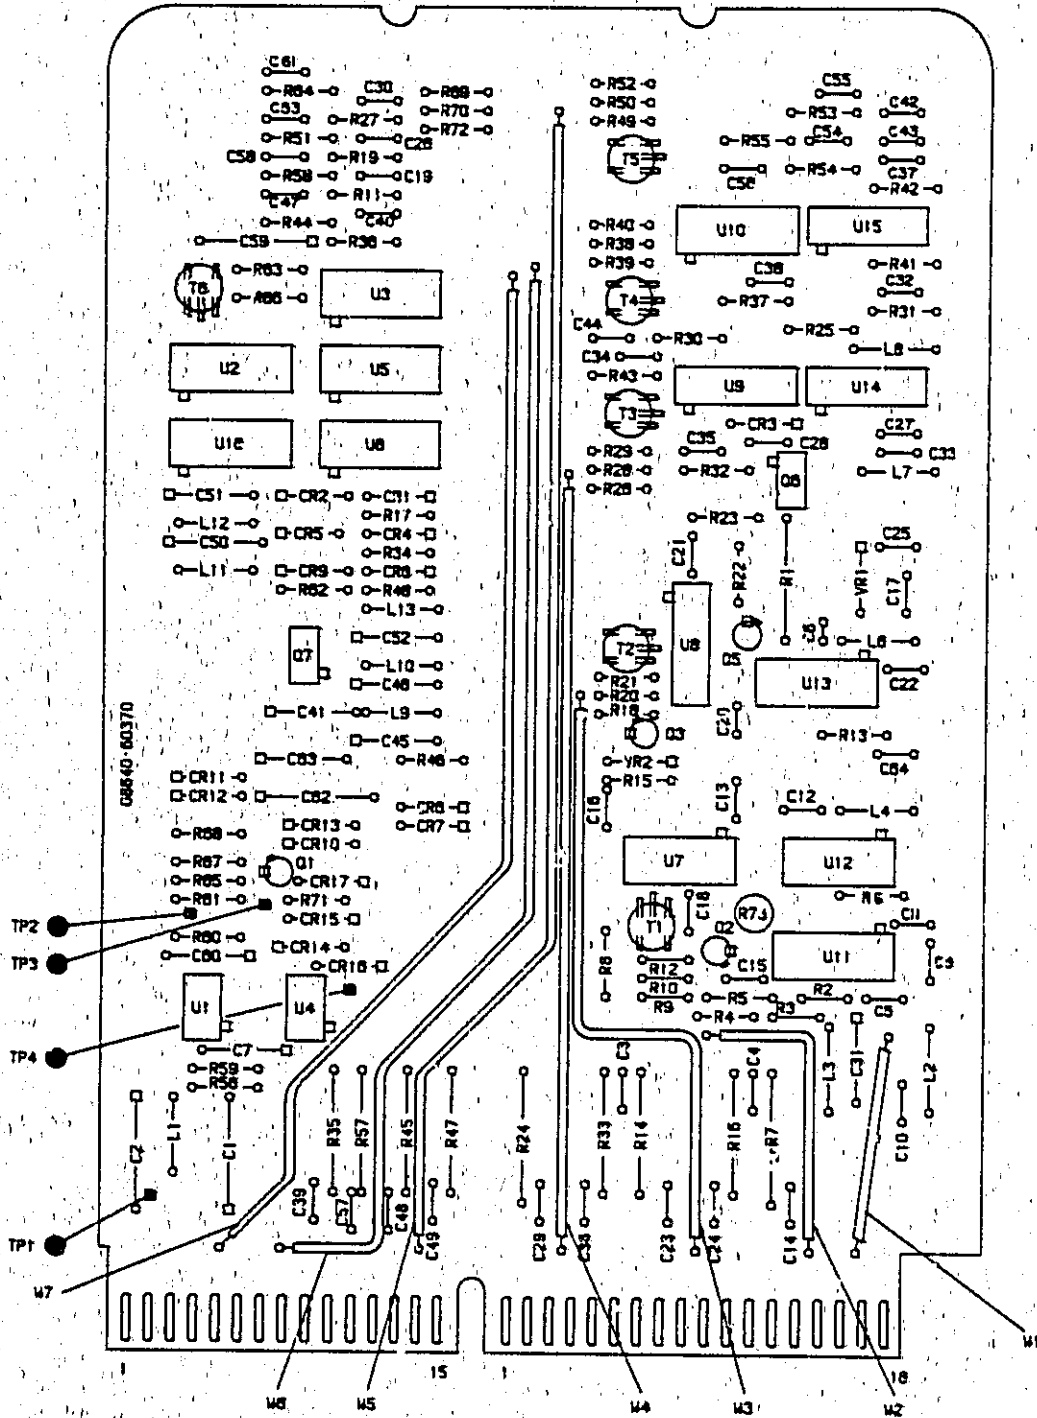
A10A2 RF Divider Assembly Component Locations (P/O CHANGE 30)
